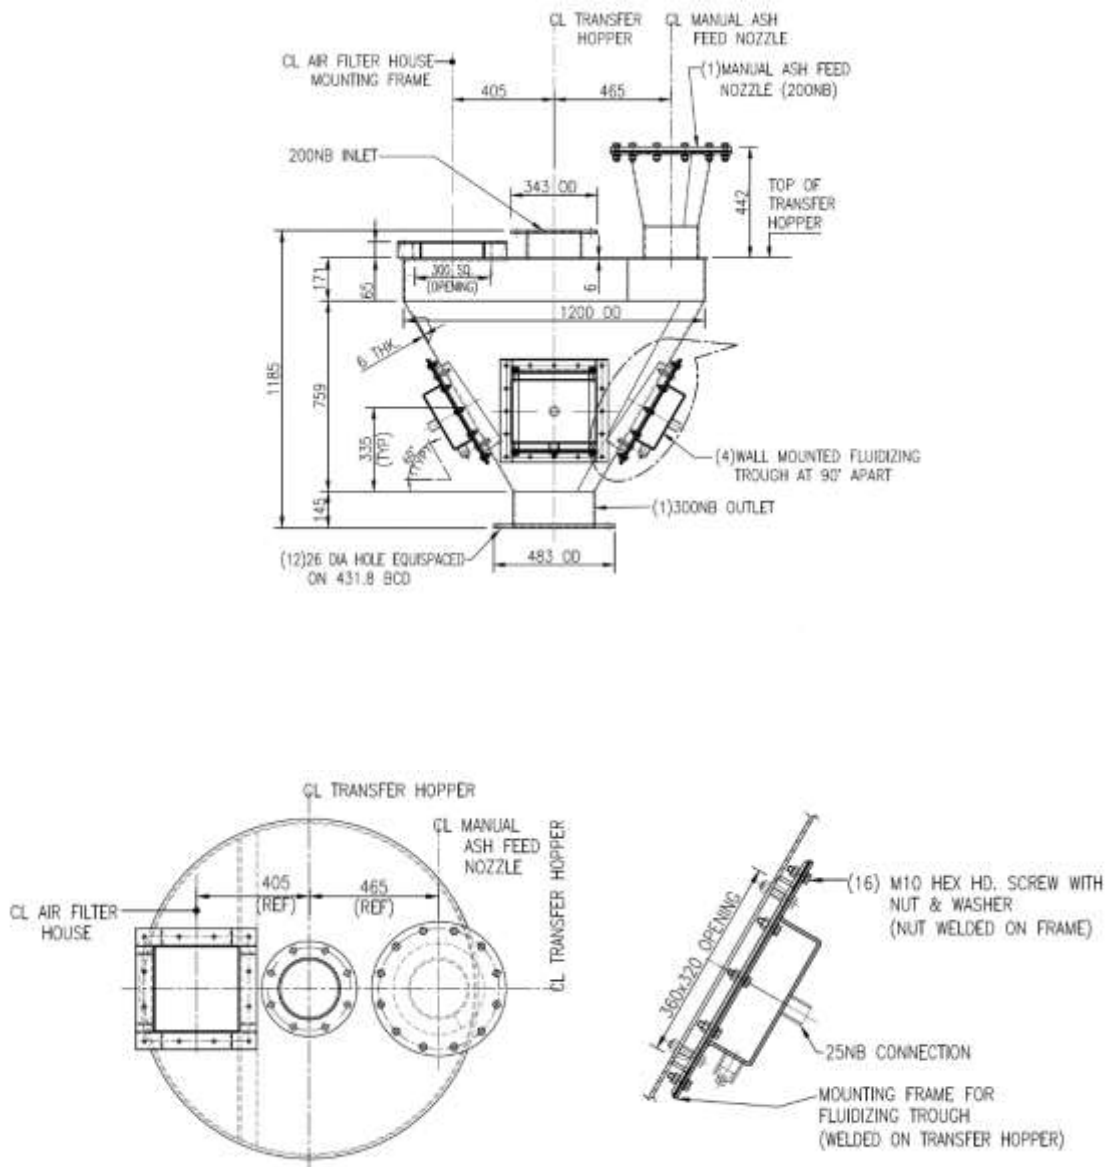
Design drawings of the transfer hopper vessel and trough type fluidizer
